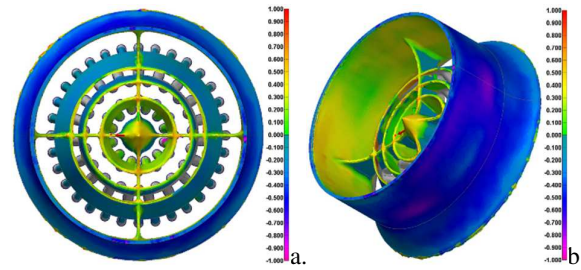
SLA measurements: a. Back side view; b. Bottom right view
